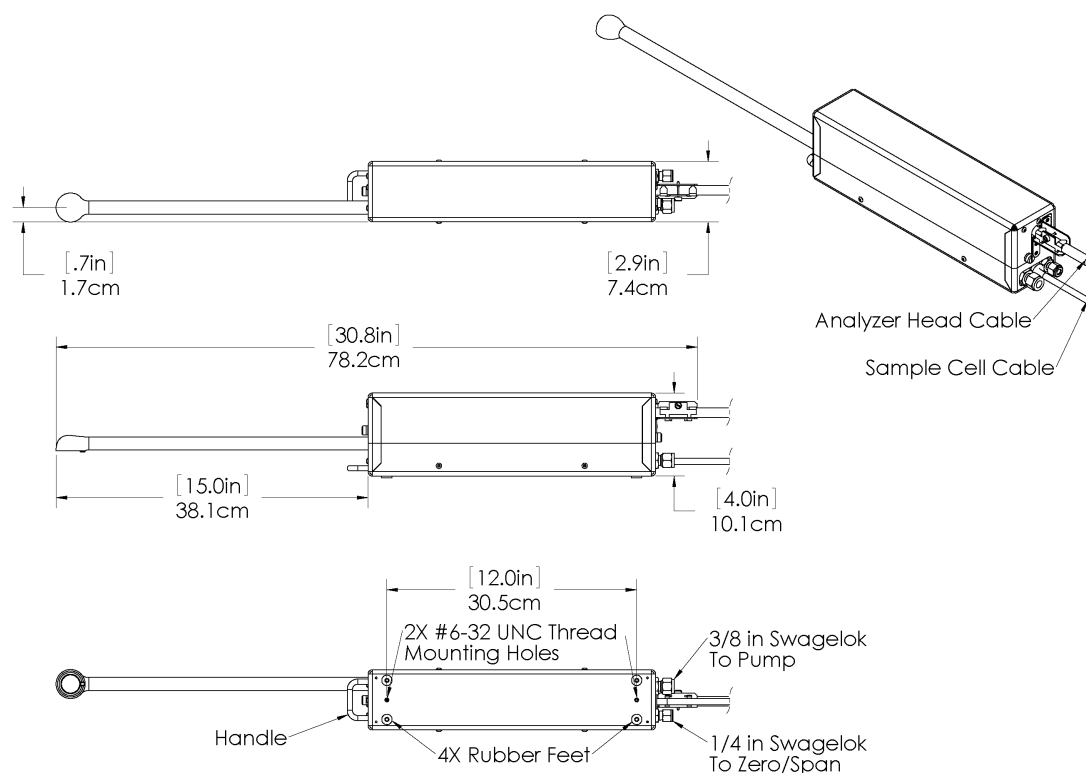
Dimensions of EC155 analyzer head with optional heated intake
